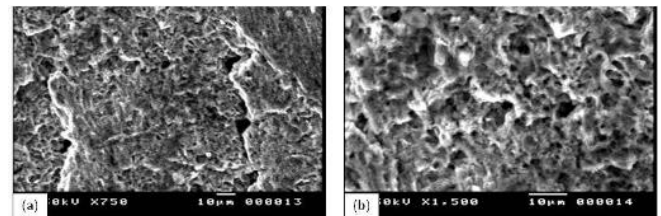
Scanning electron microscopic photographs of the fracture surface showing brittle fracture mode where fissures were propagated through voids formed in pearlite colonies.
